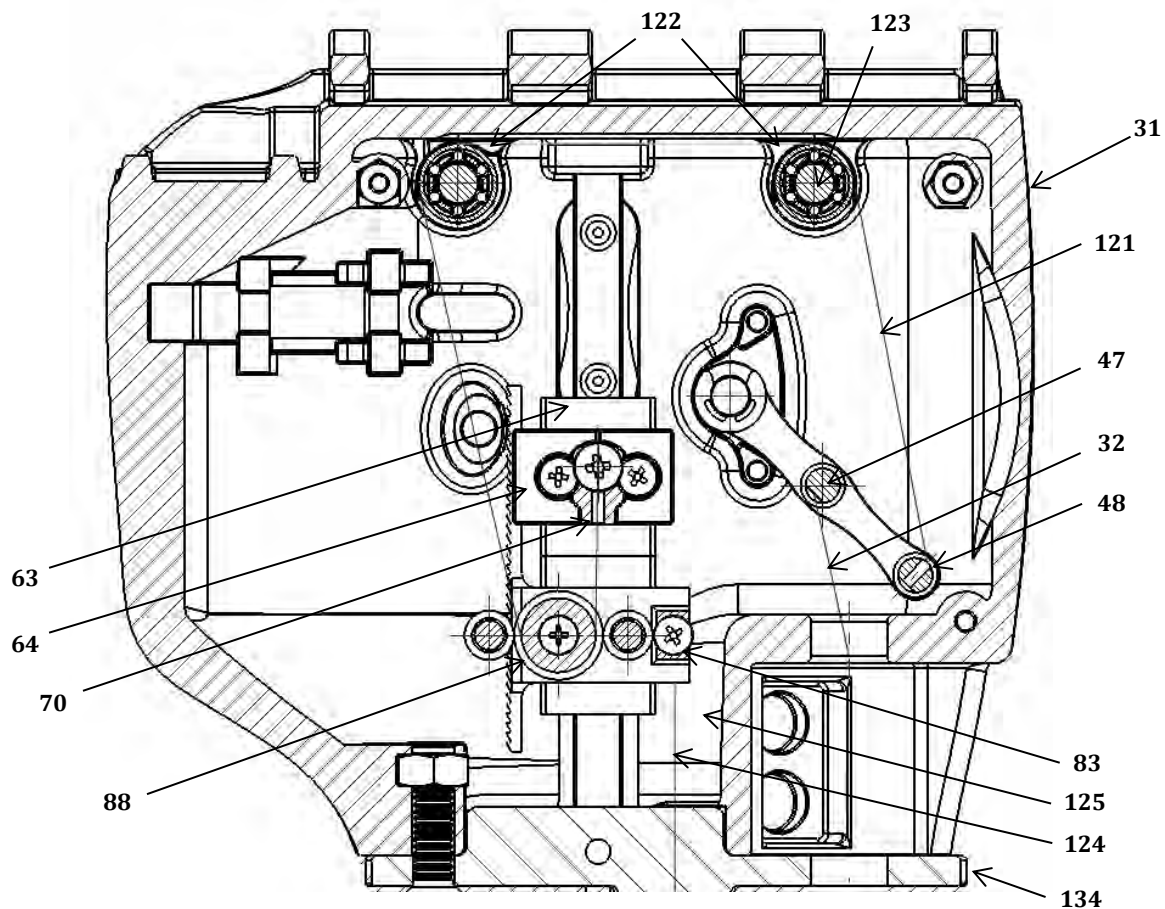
Palmar section view indicating the routing of the primary, palmar and thumb actuating cables of the hand.
